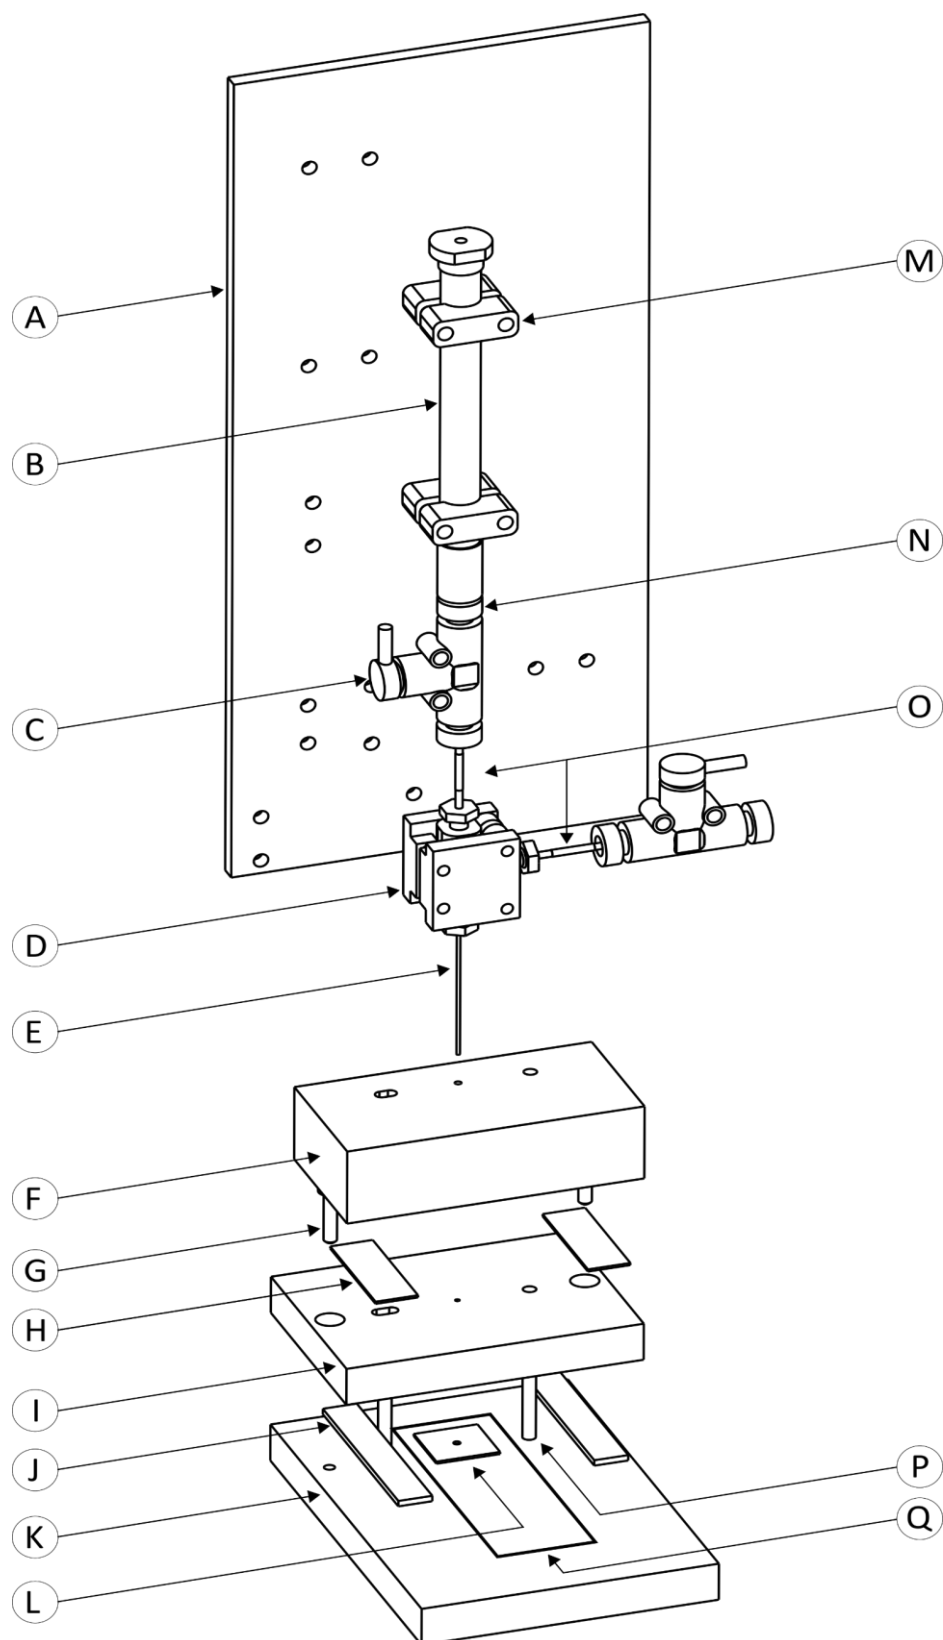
Exploded CAD view of the charging and sealing apparatus used to seal inlets by Indium cold welding. (A) Support back plate. (B) Gas chromatography syringe. (C) Manual shut-off valve. (D) High pressure low dead volume T connector and supports. (E) Stainless steel tube 1/32"OD – 100µm ID. (F) Syringe alignment support. (G) M3 screws (ISO4762). (H) Spacer – Tip travel. (I) Gasket clamp with syringe pass-through. (J) Spacer – Gasket clamp. (K) Base plate. (L) Flat gasket. (M) Syringe supports. (N) Syringe-to-valve adapter. (O) Stainless steel tube 1/16inOD – 500µm ID. (P) 3mm pins. (Q) Silicon device.
